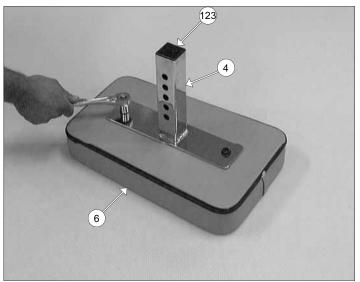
Using a rubber mallet, insert one Plastic Insert Cap 1 3/4 (#123) into the tube-end of the Bench Press Adjustable Seat Frame (#4). Next, attach the Bench Press Adjustable Seat Frame (#4) to the Bench Press Seat Pad (#6) using two Hex Head Cap Screws 3/8-16 X 1 1/4 (#96), and two Flat Washers SAE 3/8" (#93).
